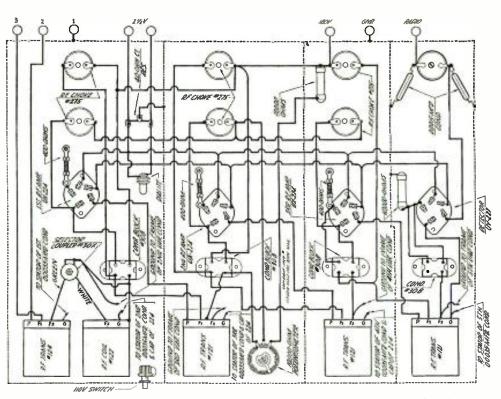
Graphically the parts and all wiring is illustrated in this drawing
